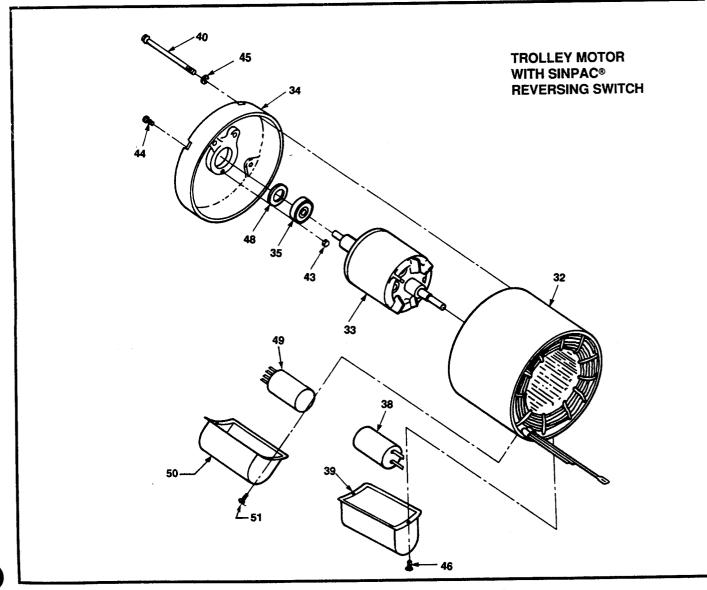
A. TROLLEY MOTOR PARTS (SINGLE PHASE)
